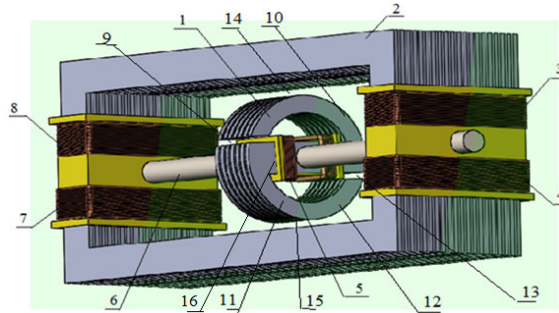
Construction schemes of the transformer with the measuring transformer of the angular displacement.
